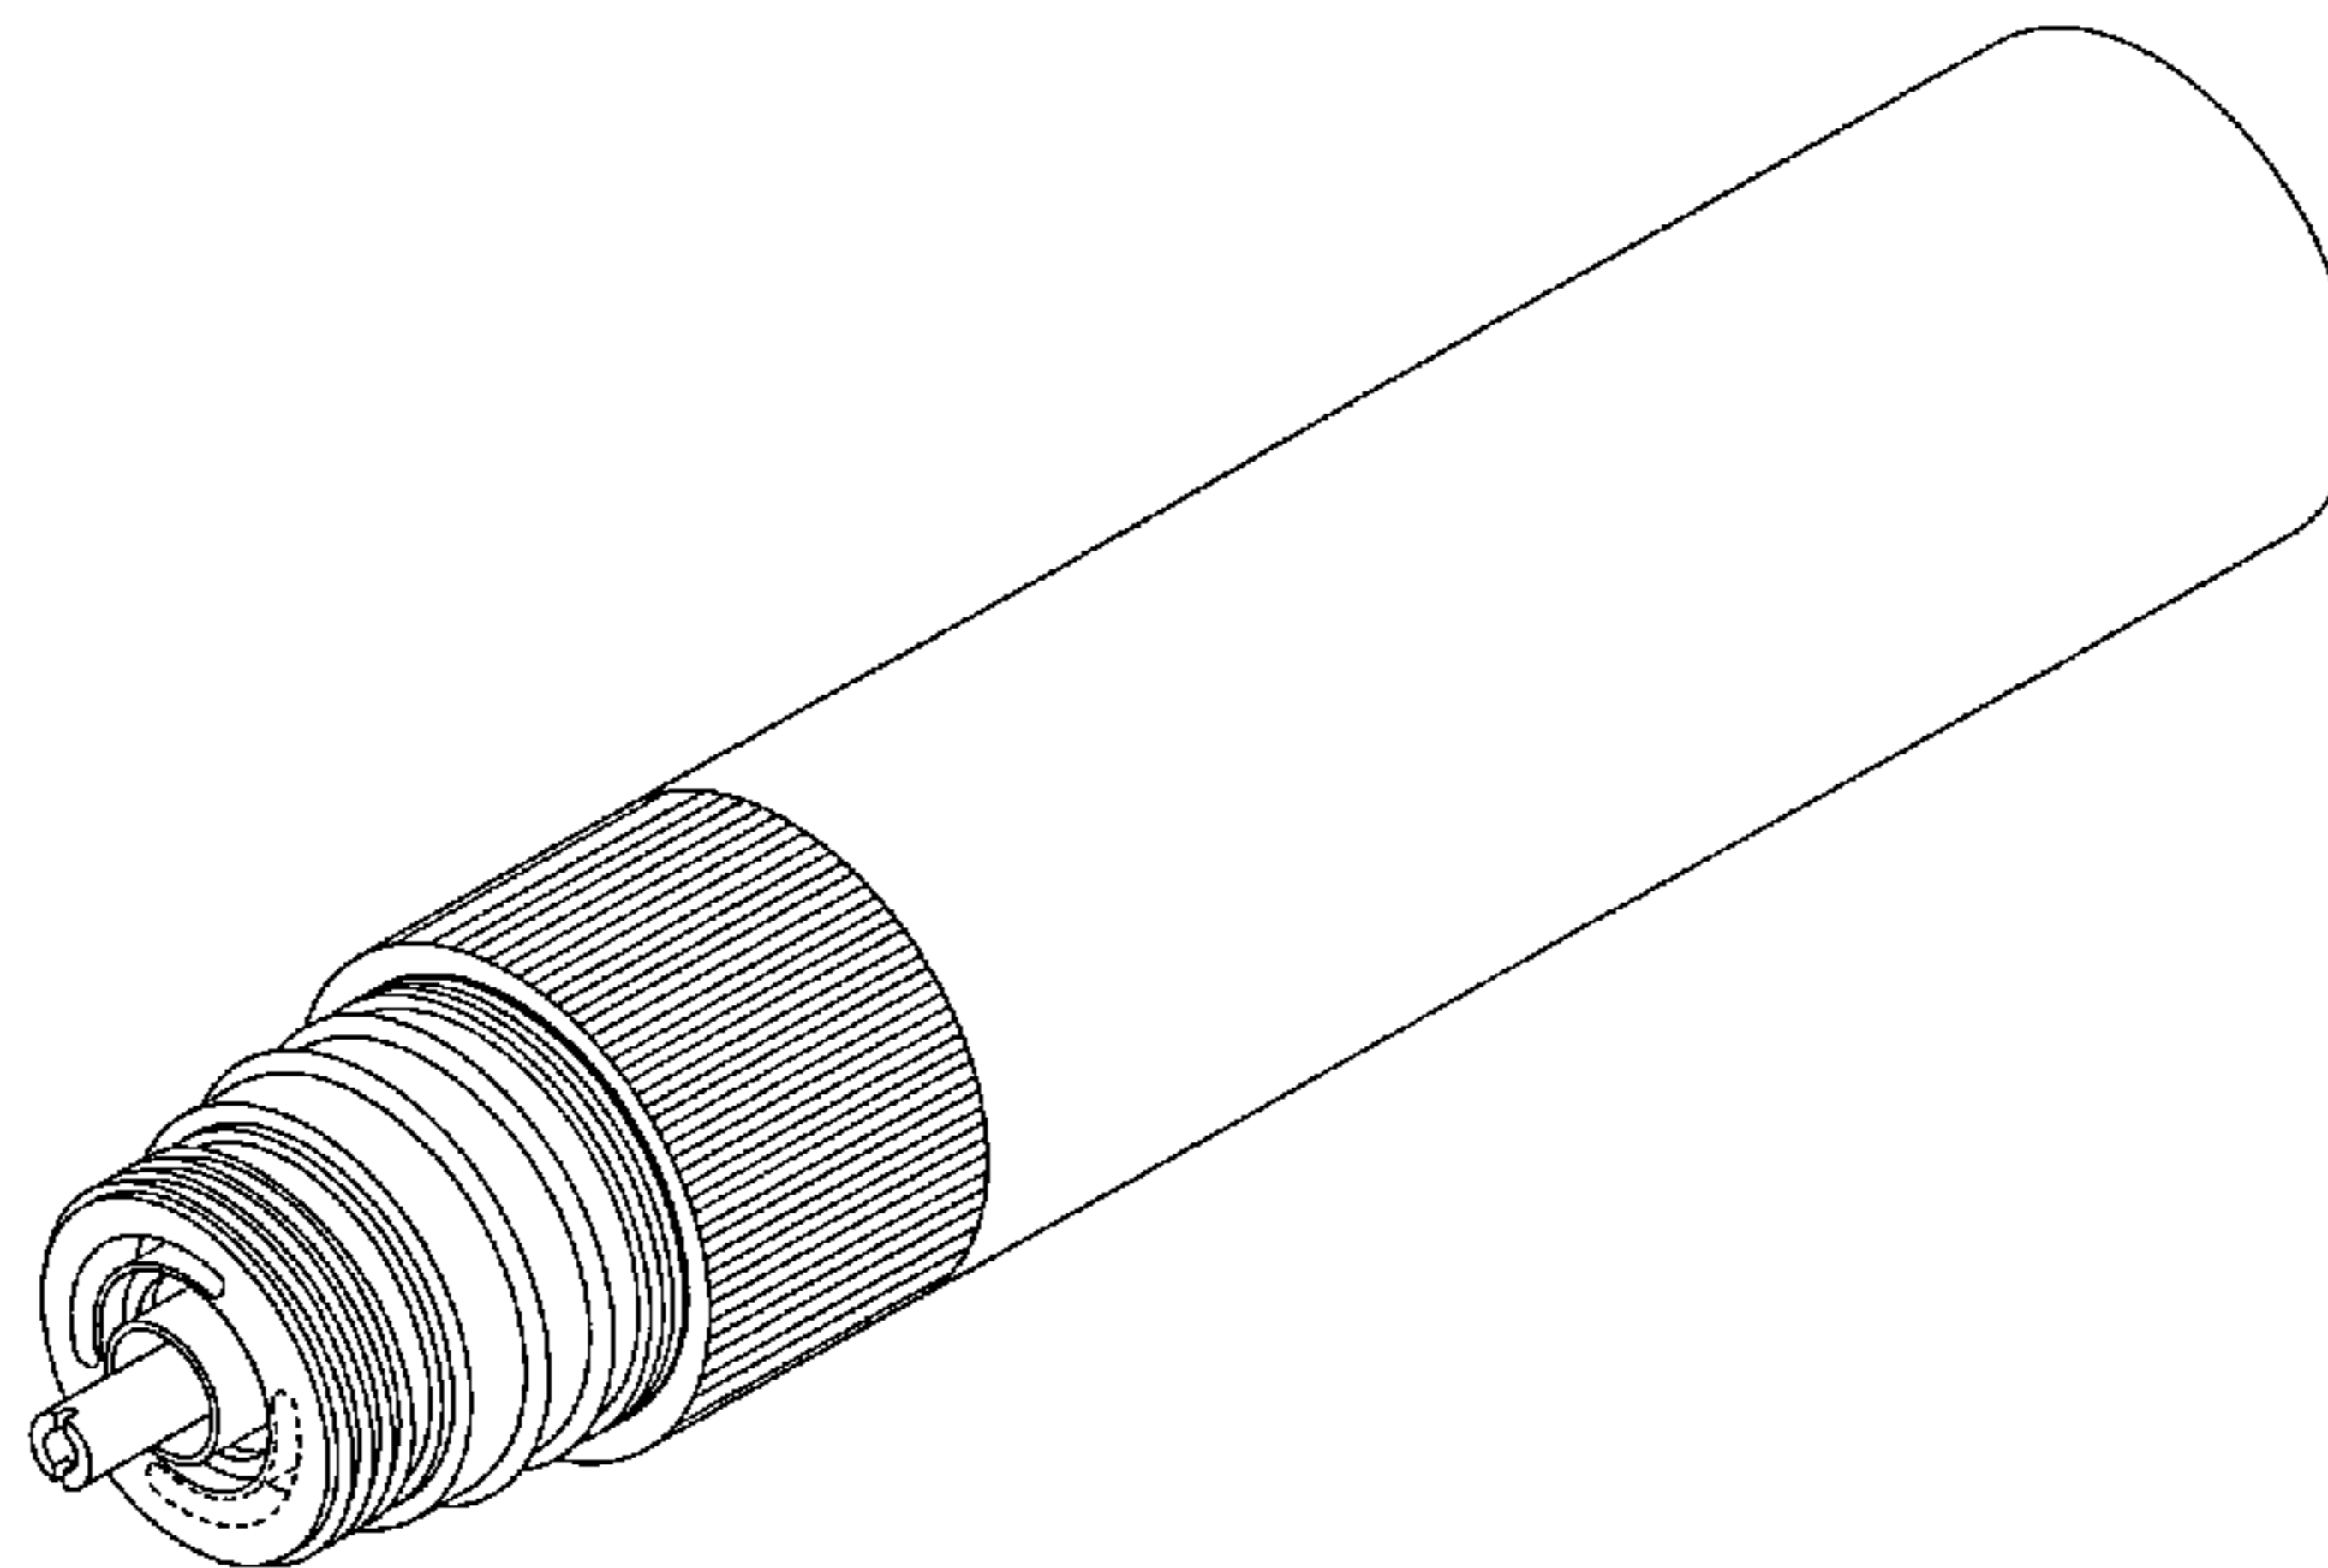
is a perspective view of a plasma torch body showing our design; and,
